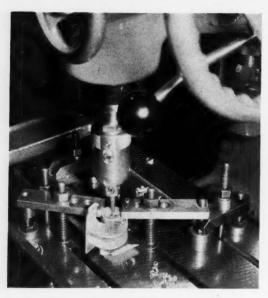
Boring the Hub of Bracket for an Air Scoop Door. In Machine is a Moore Jig-Boring No. chine, and the Tool is Carbolog
